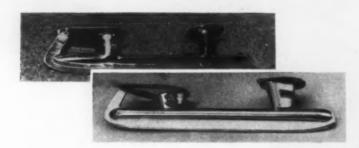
Forming and assembly operations on new Union Hardware hockey skate are considerably reduced. Components are now 4 instead of 8.
